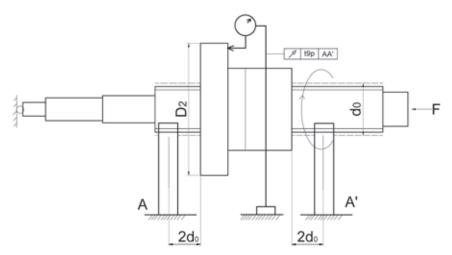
Measurement of the axial runout t_9 of the contact surfaces of the Ball Screw nut
